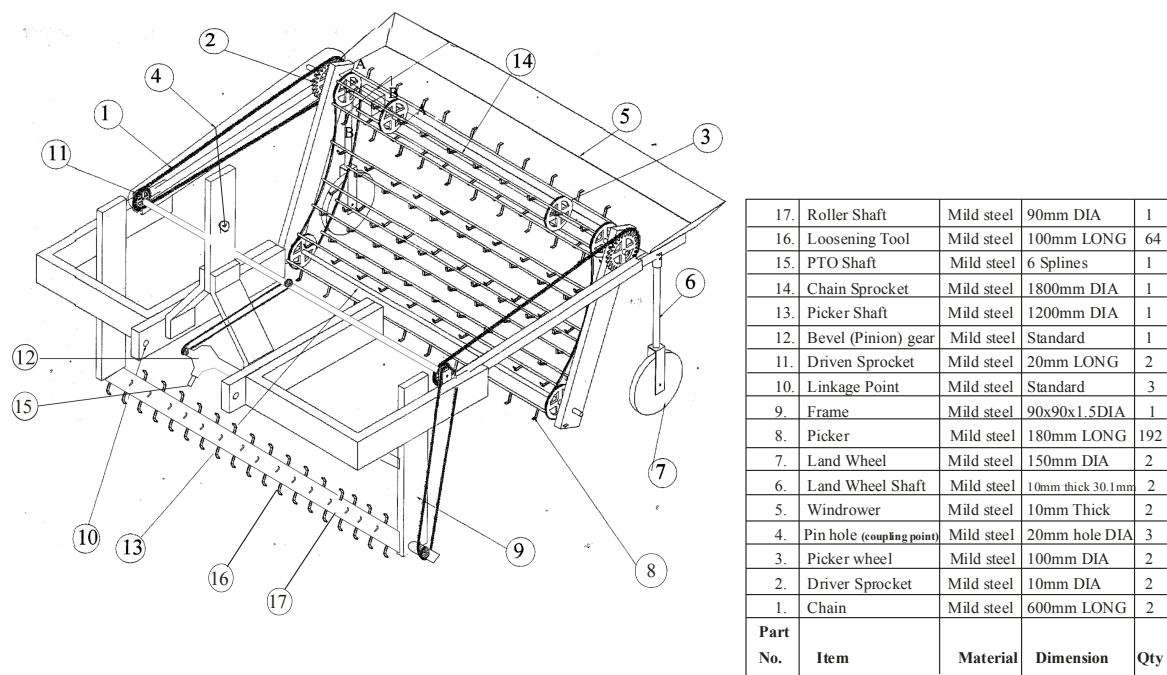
Isometric Drawing of the Tractor Mounted Groundnut Harvester
